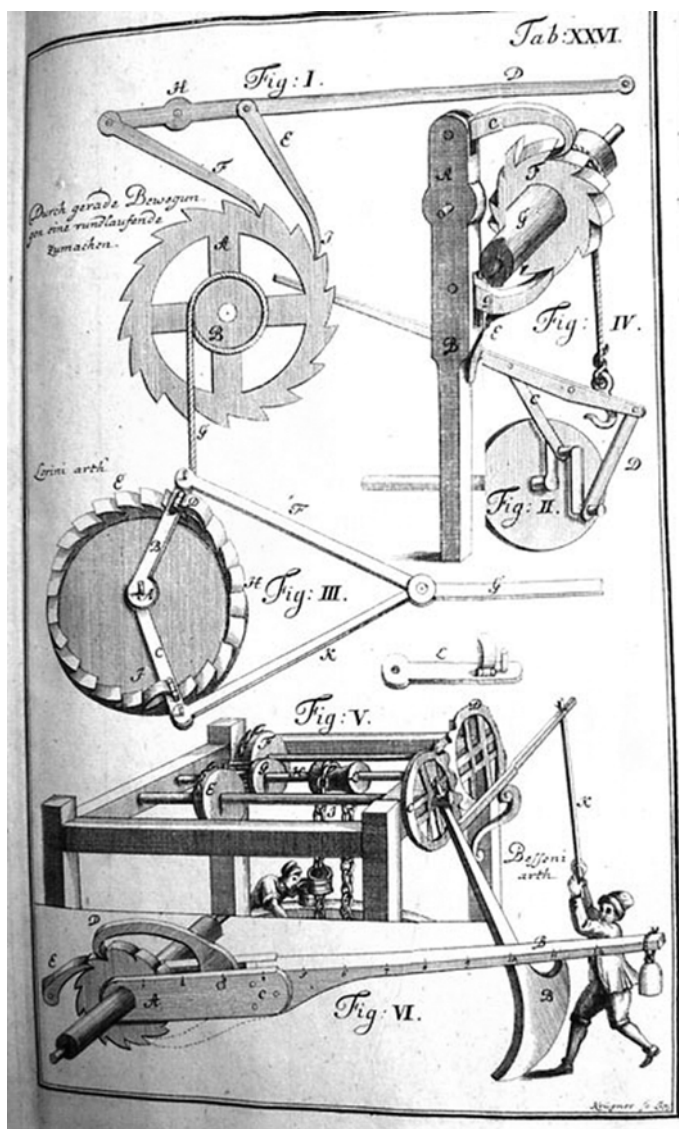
Machine elements drawings (ratchets) of Jacob Leupold (1724)
